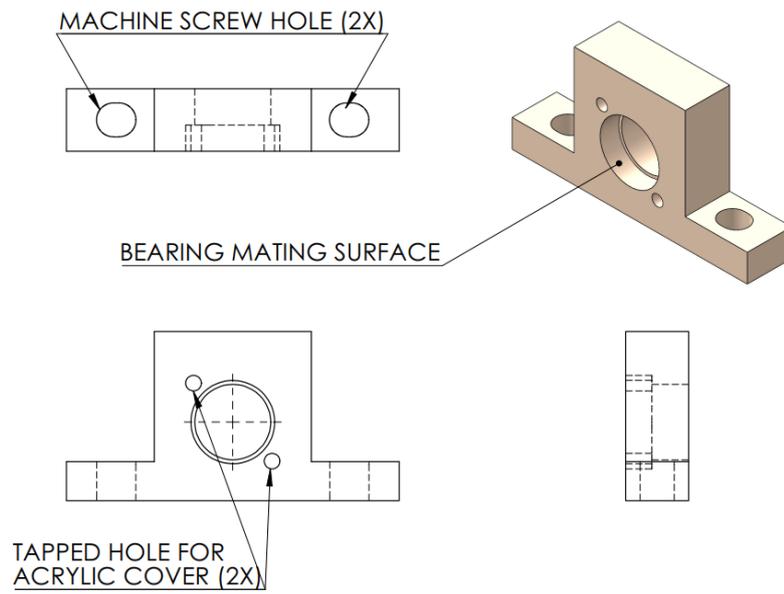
Engineering drawing of housing designed for 6002 bearing.
